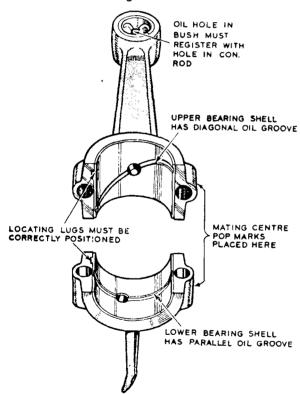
UPPER AND LOWER BIG END BEARING SHELLS ARE NOT INTERCHANGEABLE AND SHOULD BE FITTED AS SHOWN ABOVE.
